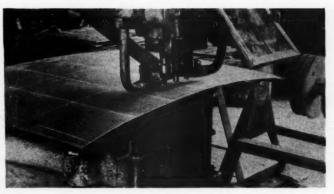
Steel plate of large area is easily moved in any direction when supported by the five ball bearings
